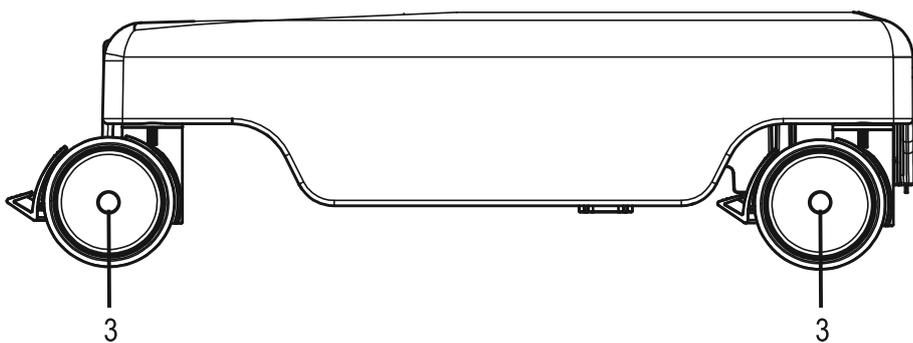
Base Platform, 4 Swivel Caster with Brake, Side View
